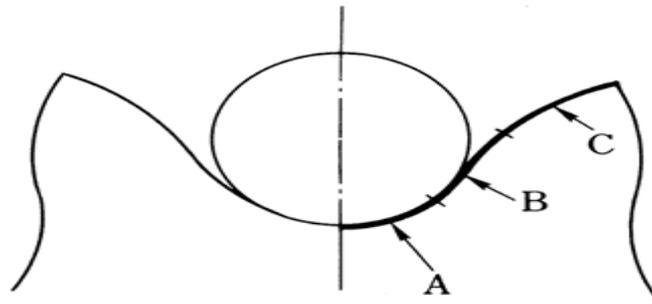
Sprocket Tooth Shape and Positions of Engagement
